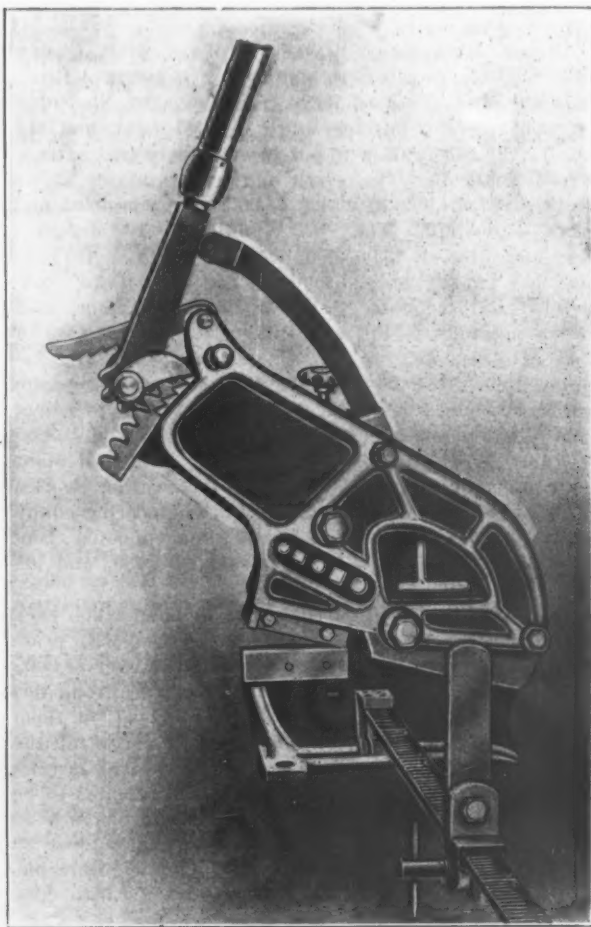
The Liberty H-VII Universal Hand Shear.
